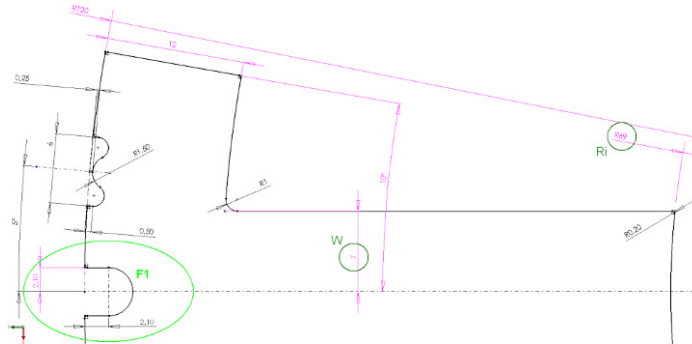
Dimensioning of the first T-lamination. The second T-lamination does not have channel for welding
